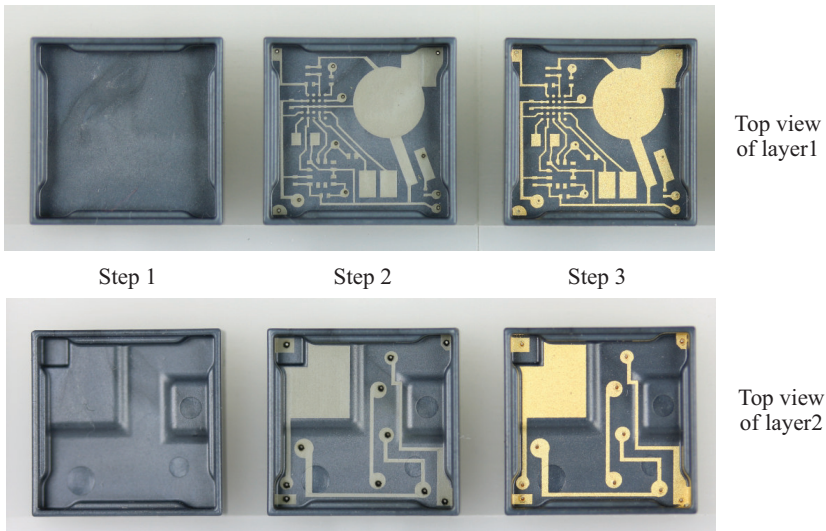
Photograph of the housing illustrating the three fabrication steps of the laser direct structuring (LDS) process.
